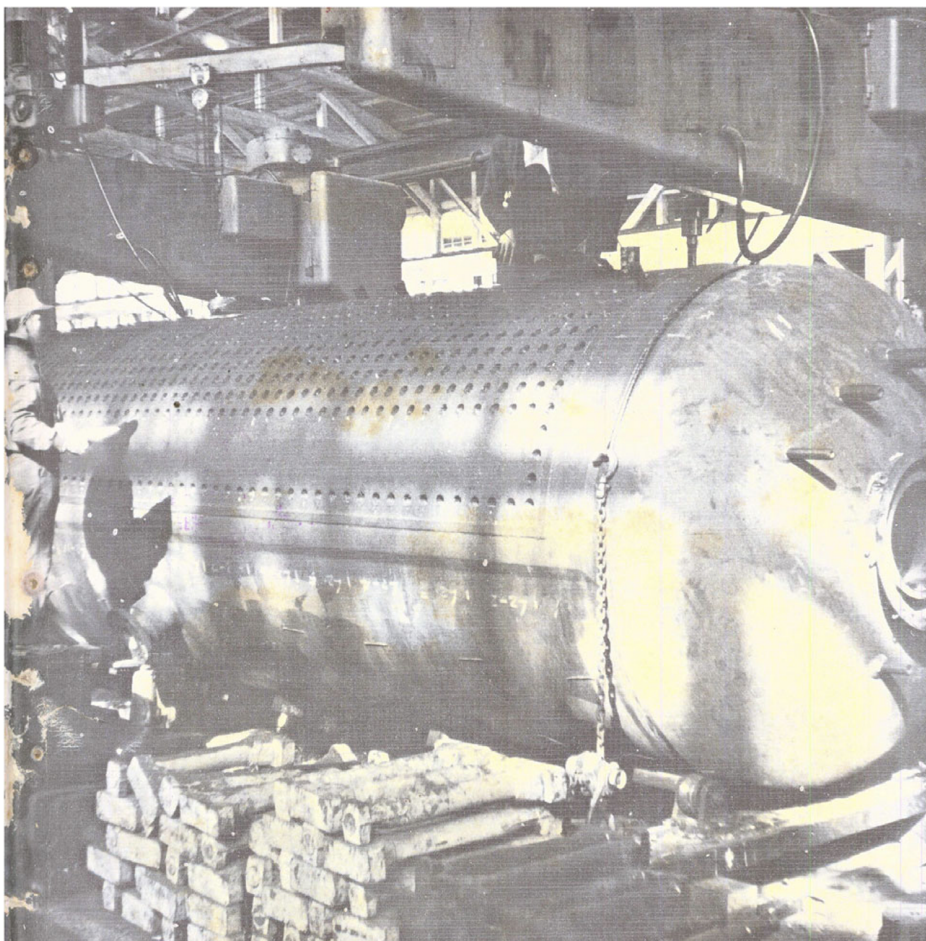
TMMC's first boiler steam drum capable of producing 240,000 lbs of steam an hour. This breakthrough enabled the firm to manufacture large industrial boilers fully in-house. *Taiji yuekan* 8.1 (Feb, 1971), cover.
